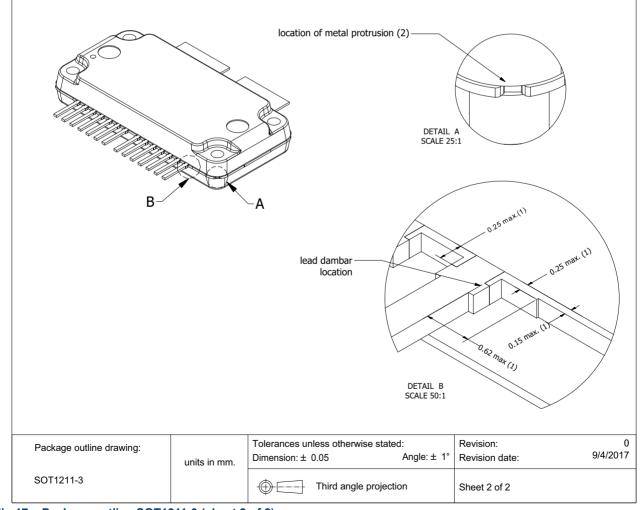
Package outline SOT1211-3 (sheet 2 of 2)
